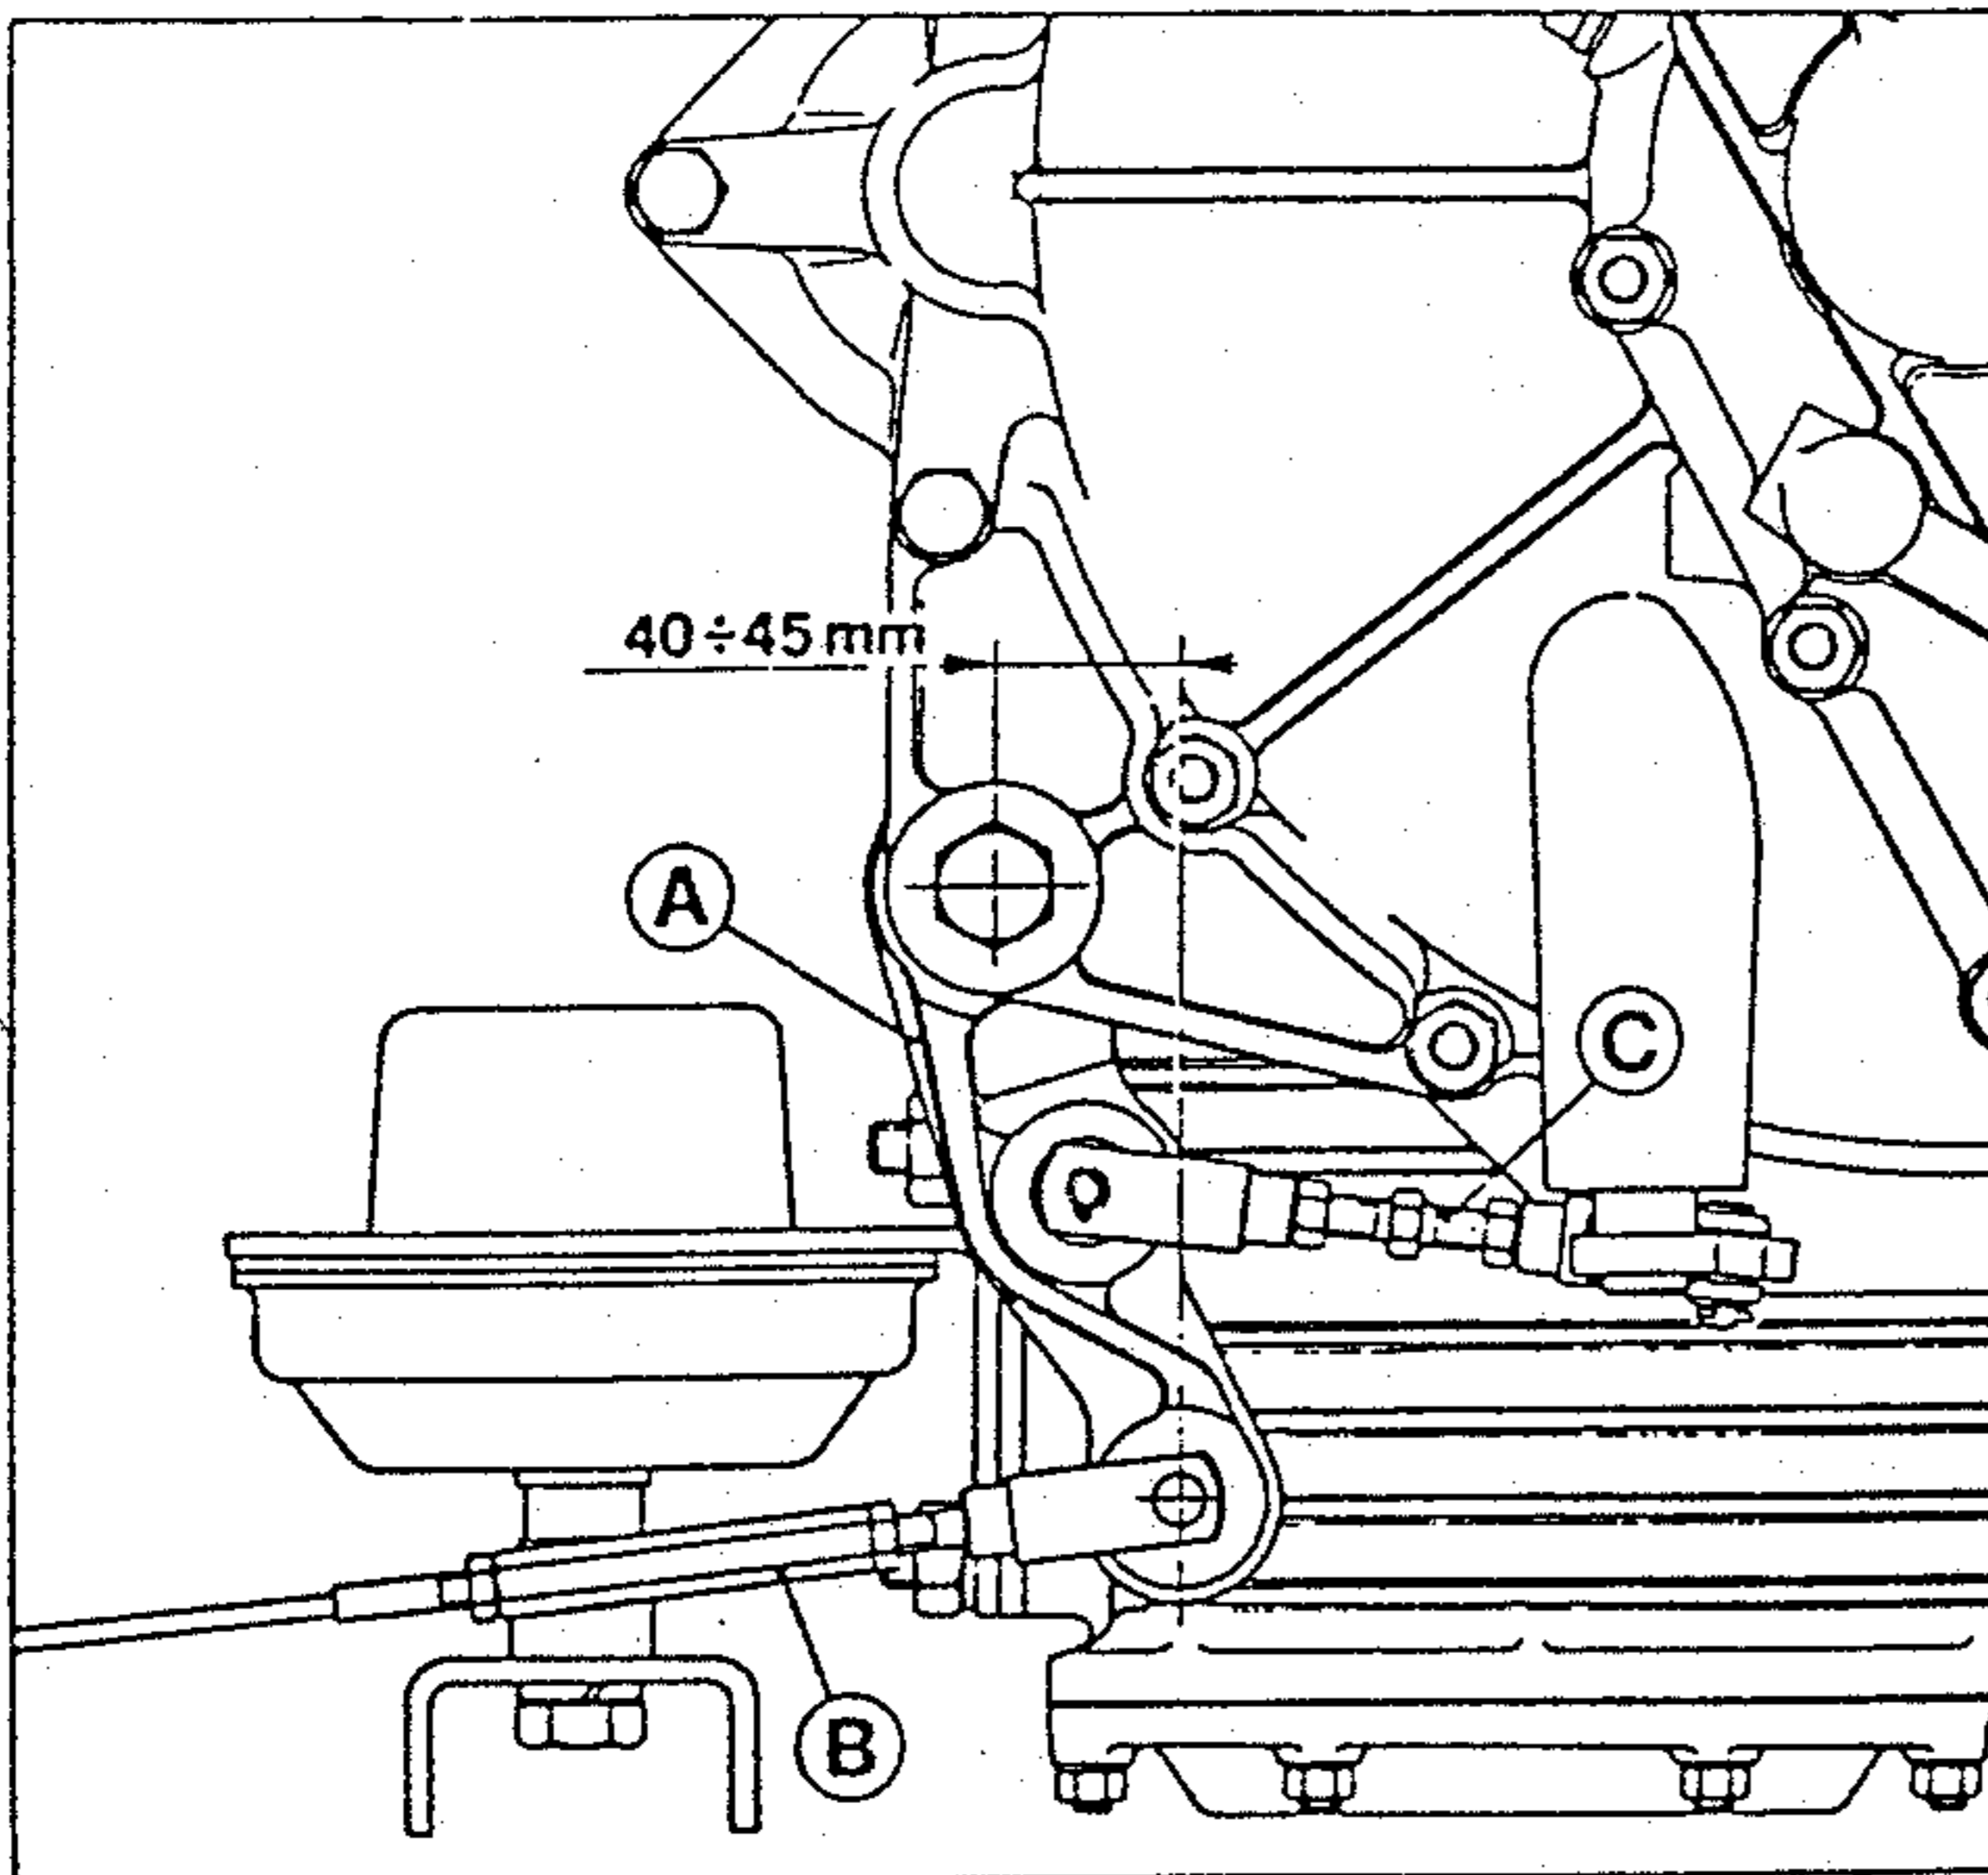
Clutch Control Linkage on the Clutch Housing.
